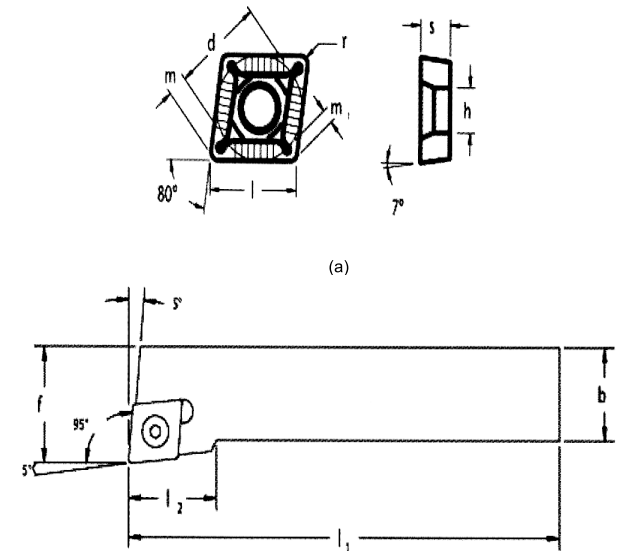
Forms and dimensions of the carbide insert and tool holder
